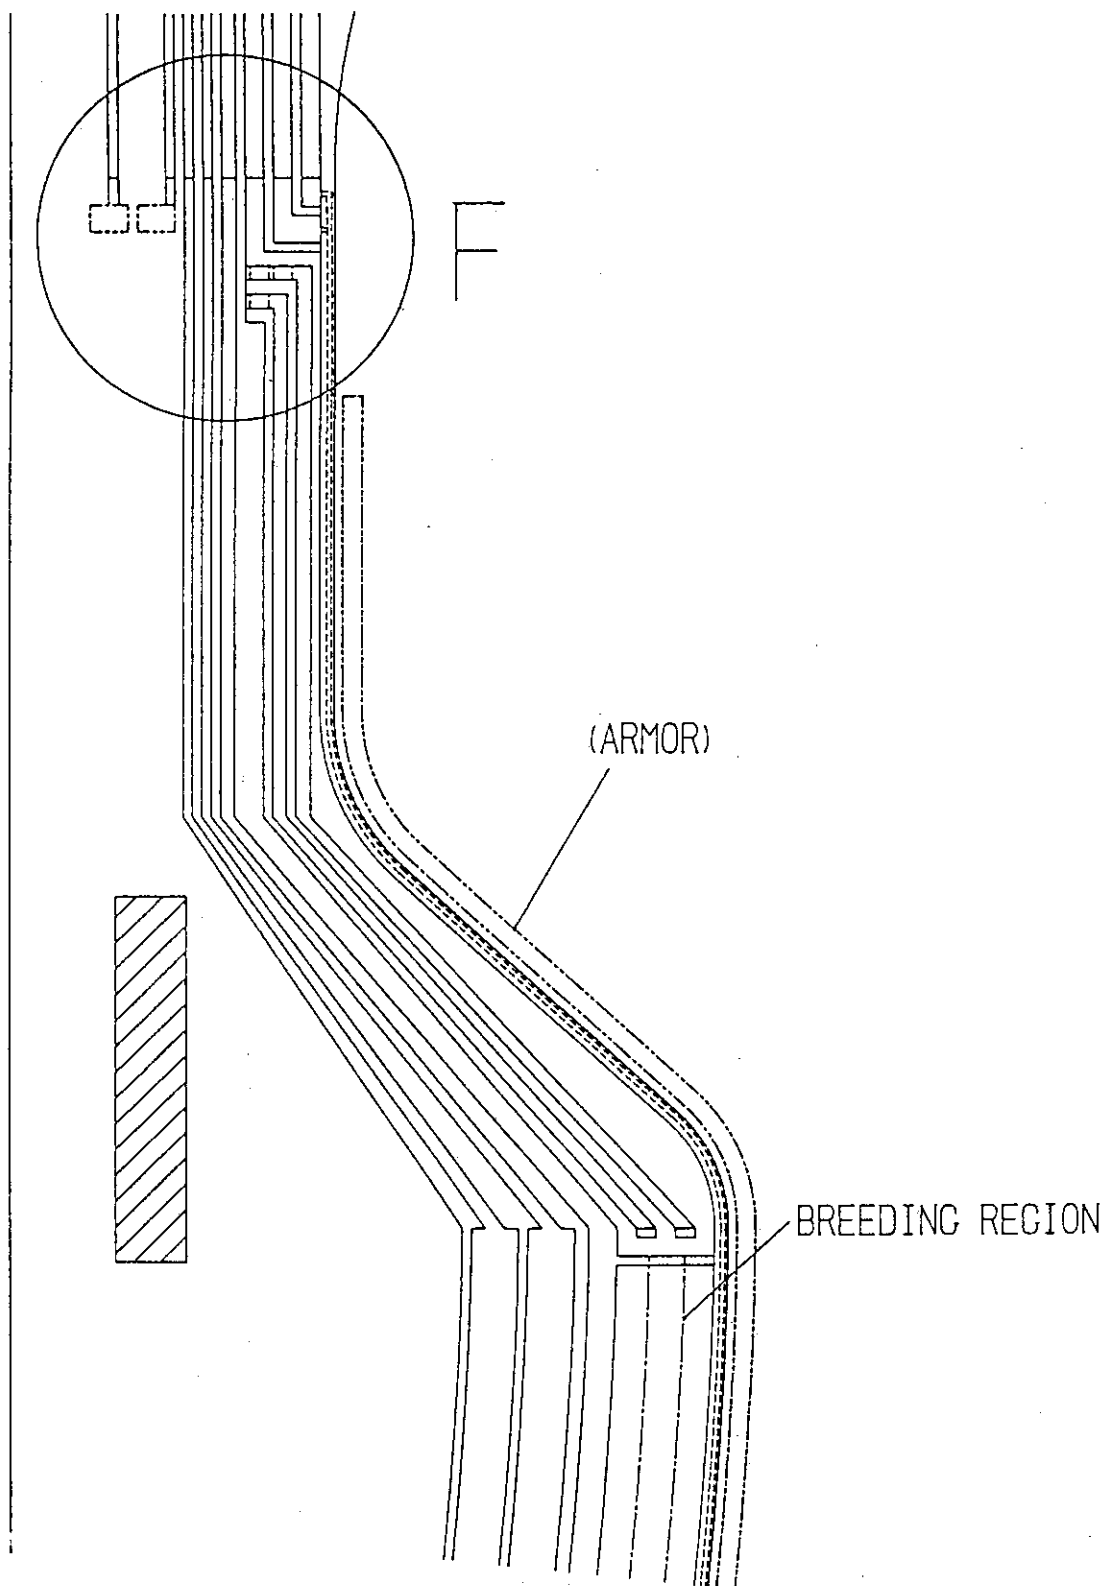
Coolant manifolds at the top of inboard blanket
